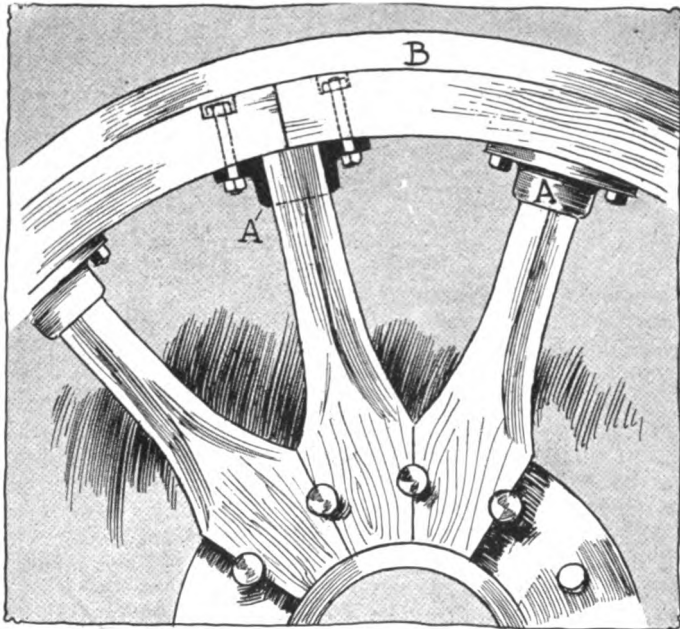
Section of truck wheel fitted with solid steel band instead of rubber tire, the band measuring 8 inches wide and 1.75 inches thick. The hub takes plain bearings
